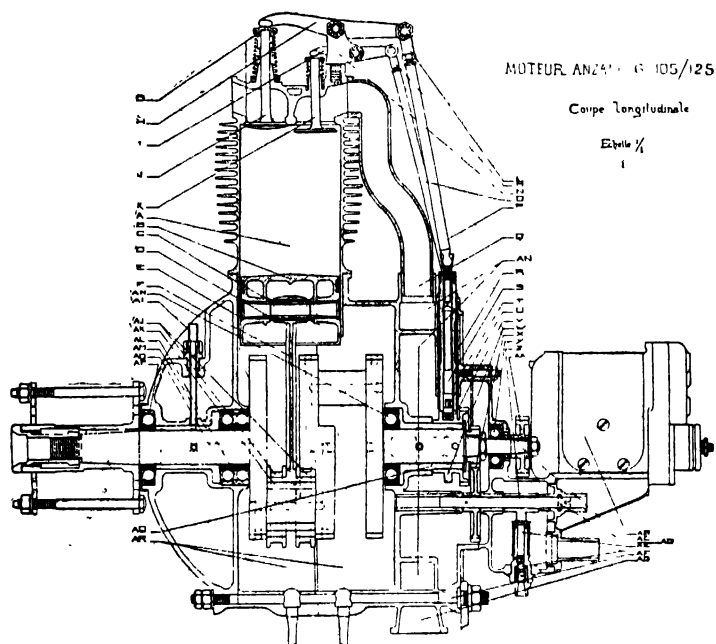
Sectional View Outlining Construction of the Six-Cylinder Anzani Motor Showing Simplicity of Valve Operating Gear and Generally Substantial Construction of the Engine.
